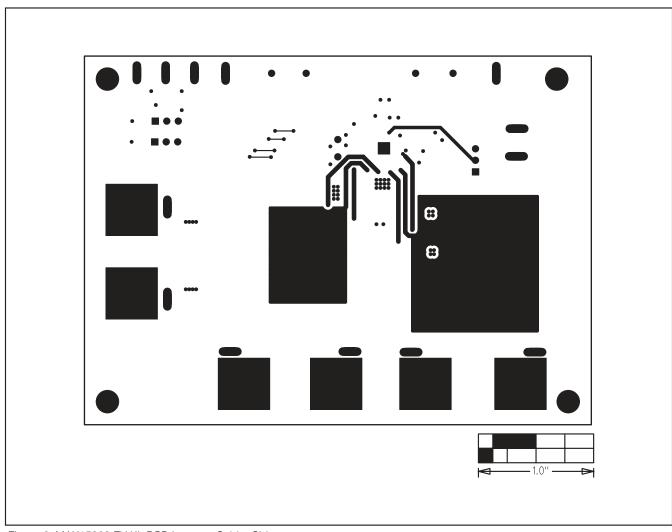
MAX15023 EV Kit PCB Layout—Solder Side
